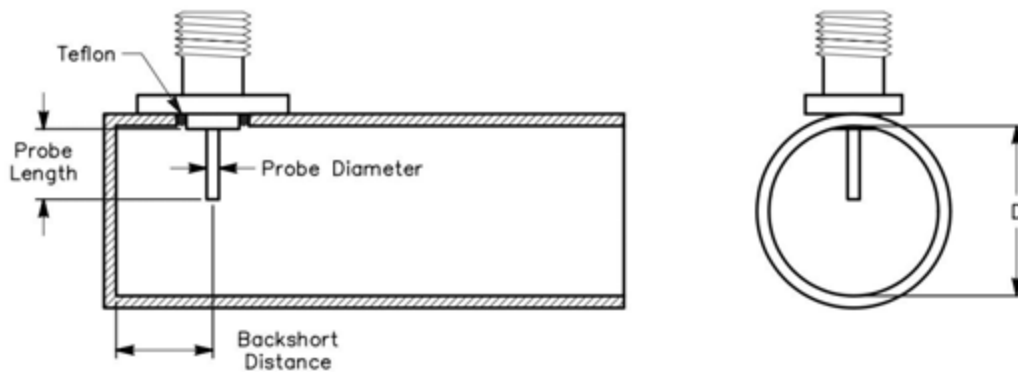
(Left) Side view and (Right) front view of a circular waveguide illustrating the basic probe placement parameters [27].
